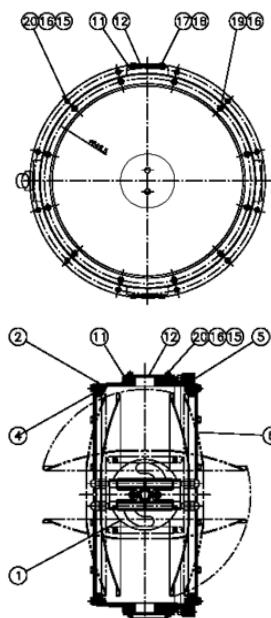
Internal assembly drawing of Gas Tight Shut-off Valve
